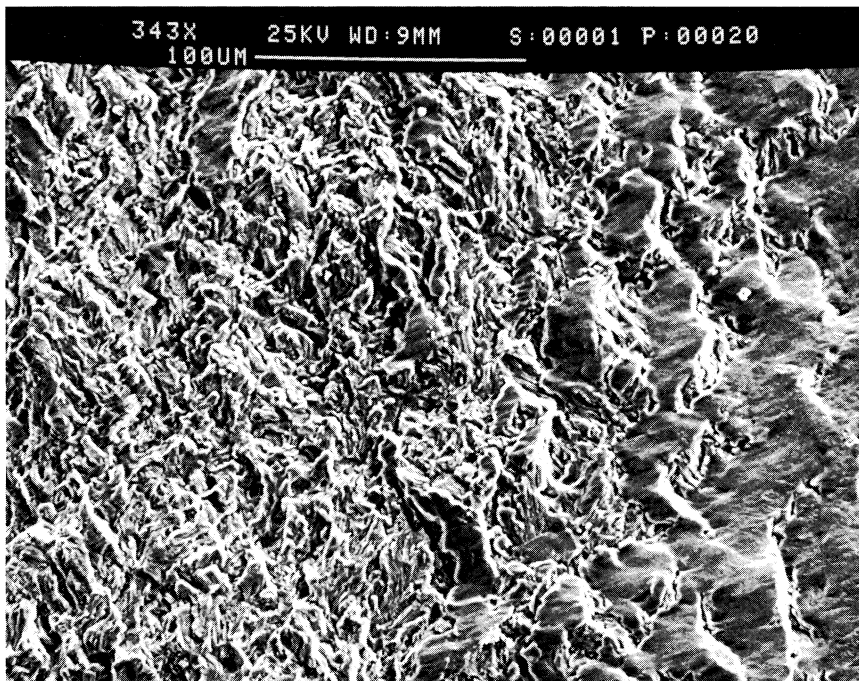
Smearing of fatigue fracture surface. Arrow shows direction of crack growth.
